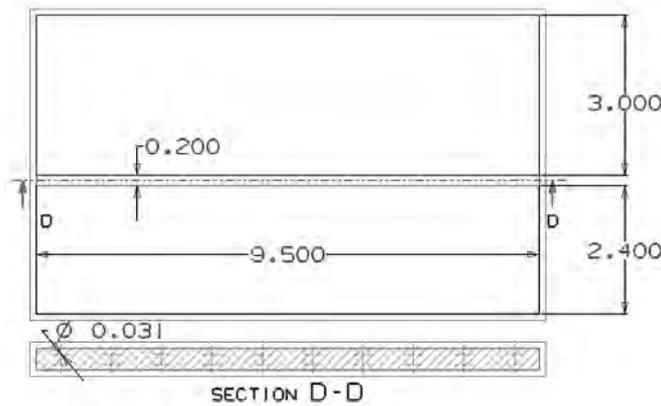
Sketch of liner with multihole cooling holes (All dimensions are in inches)
